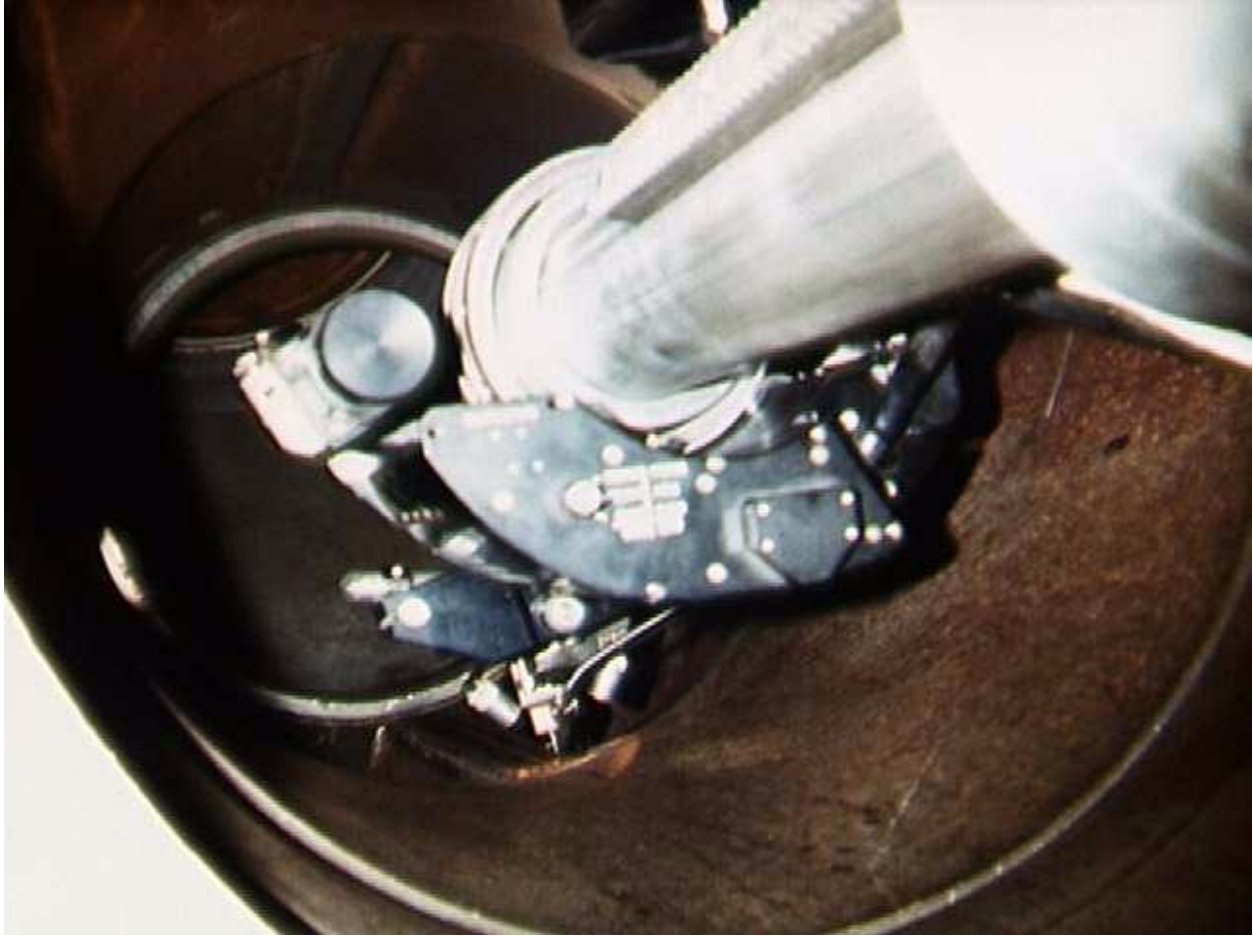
Welding of Guide Ribs on RFO8 Welding Mockup
